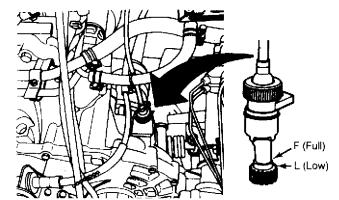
GLC & 626 Oil Level Gauge GLC location shown; 626 is similar.
